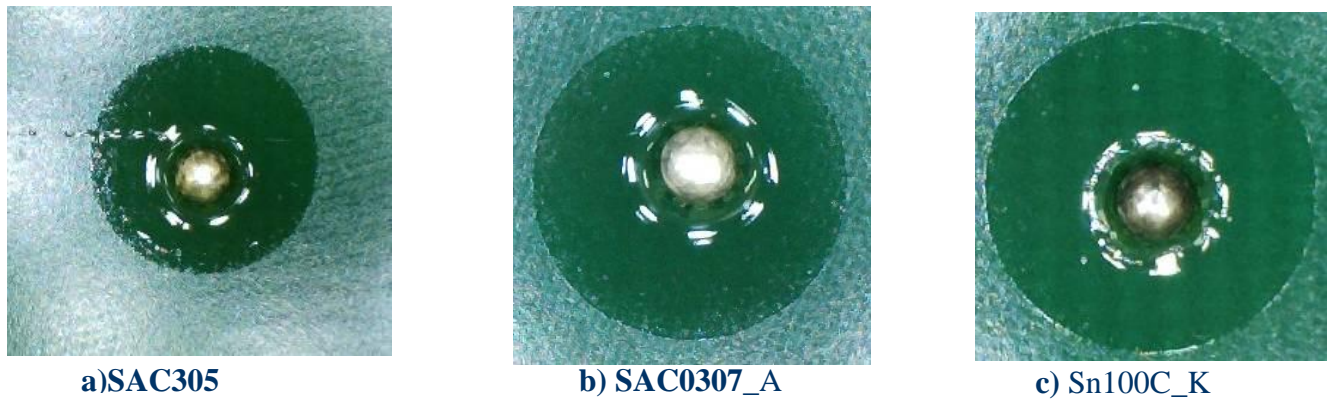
Solder Ball Test Results – Good Solder Paste Materials
